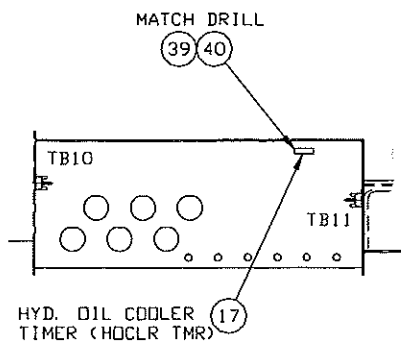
HYDRAULIC OIL COOLER ASSEMBLY (A85399, SHEET 1 OF 2)
